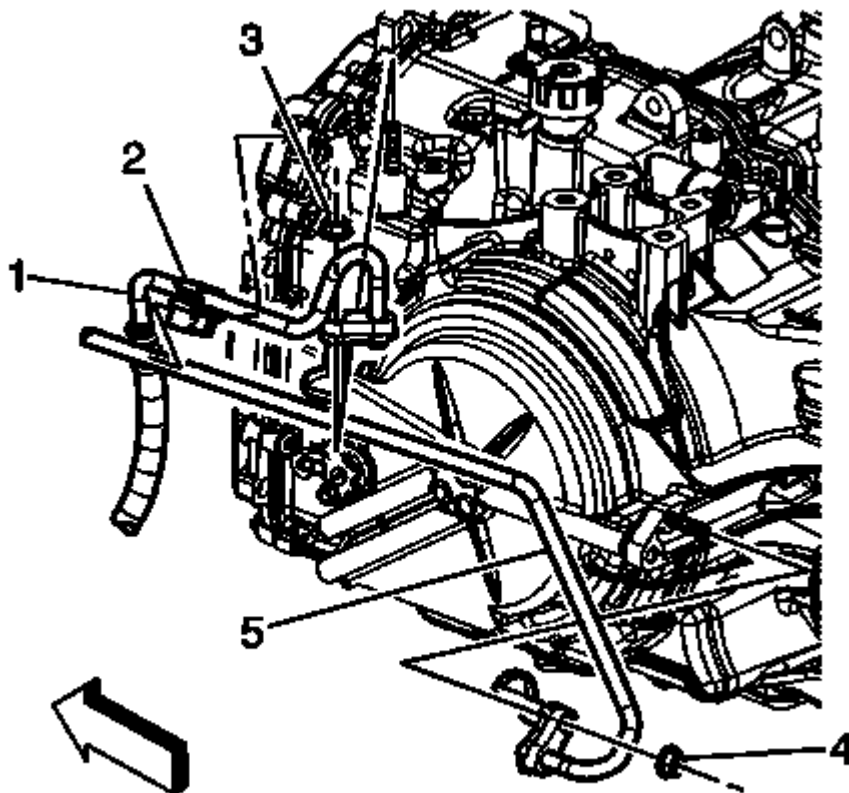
Identifying Cooler Inlet & Outlet Hoses
